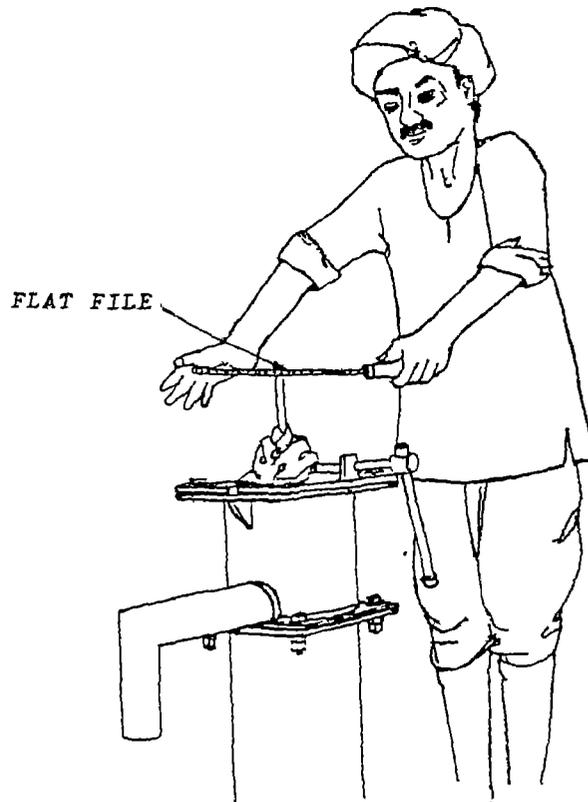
SMOOTHEN THE CUT SURFACE OF CONNECTING ROD.
